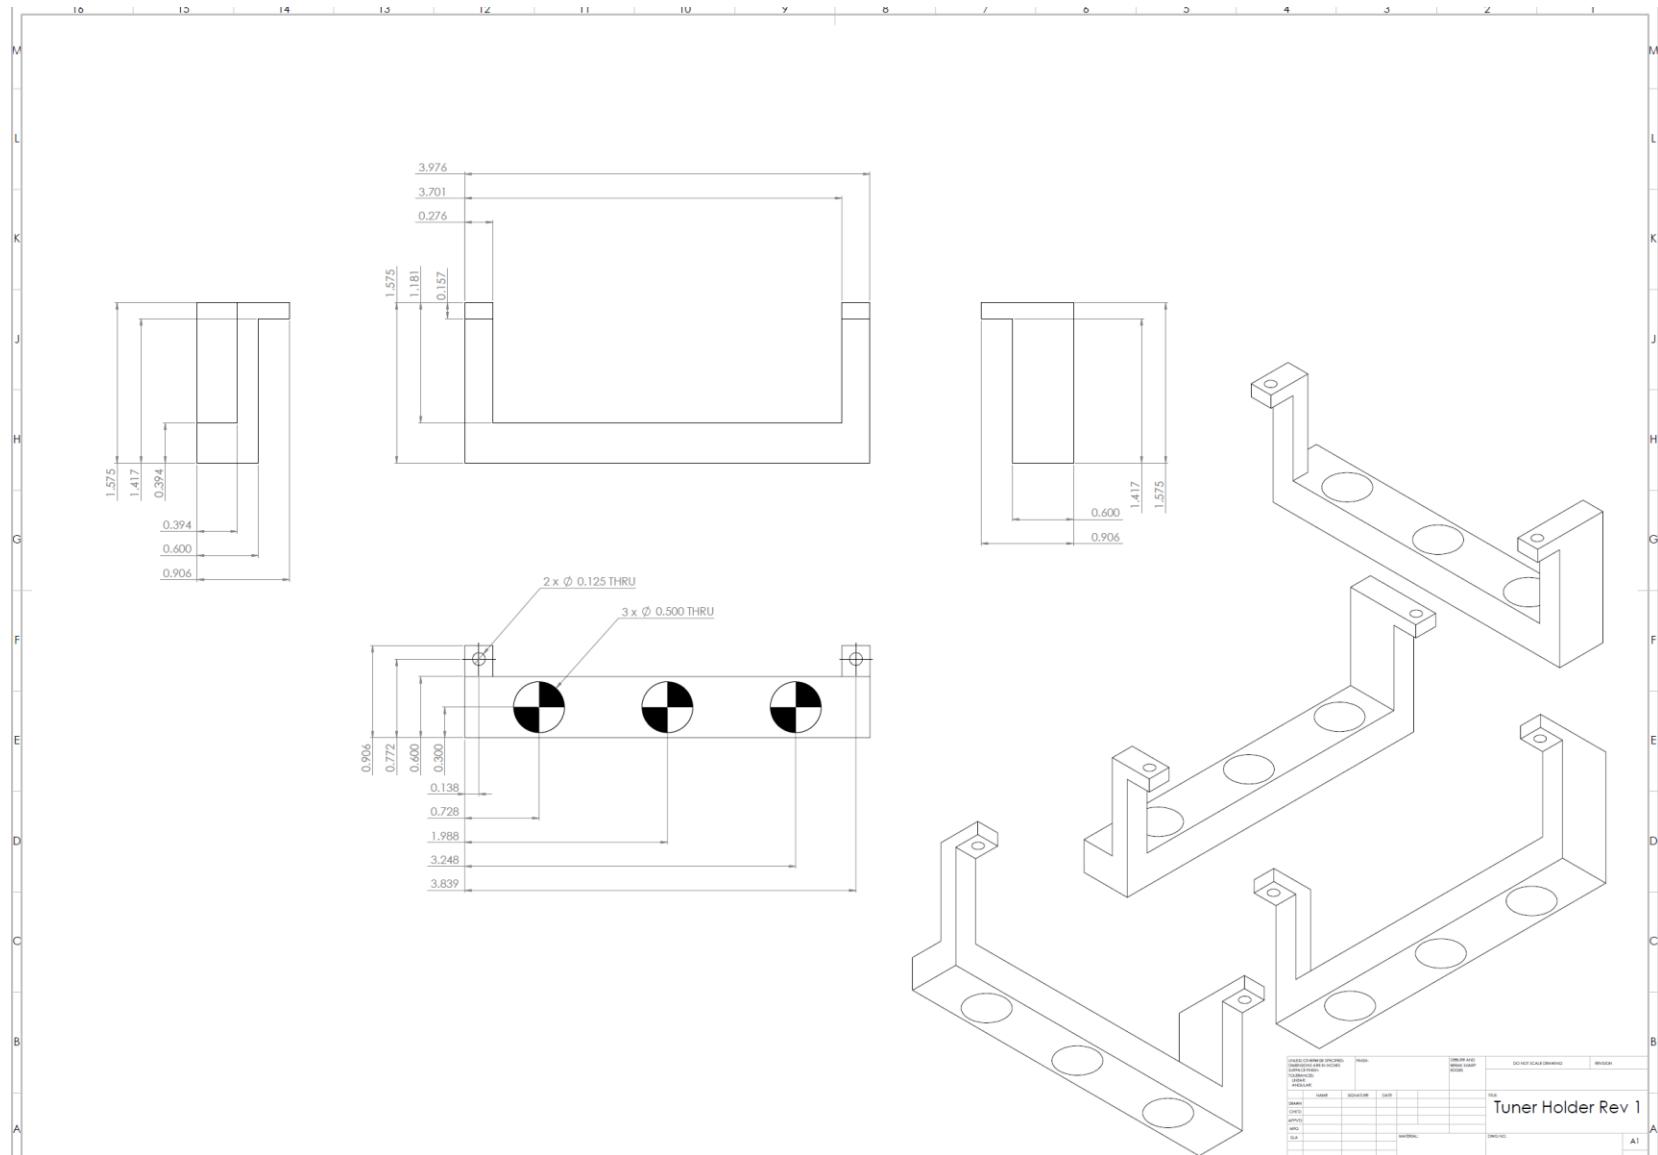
Alignment piece that guides the tuning rods into the cavities.
